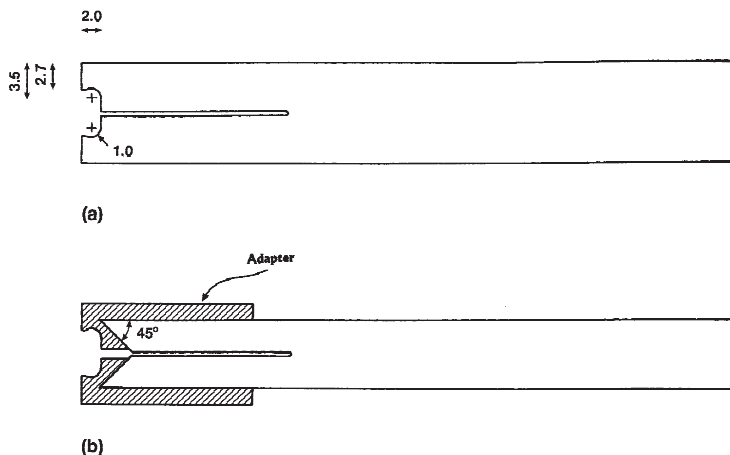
Geometry of DCB specimens: (a) specimen where the loading-point notch is made directly in the test specimen and (b) specimen where adaptors are used to minimize specimen machining.
